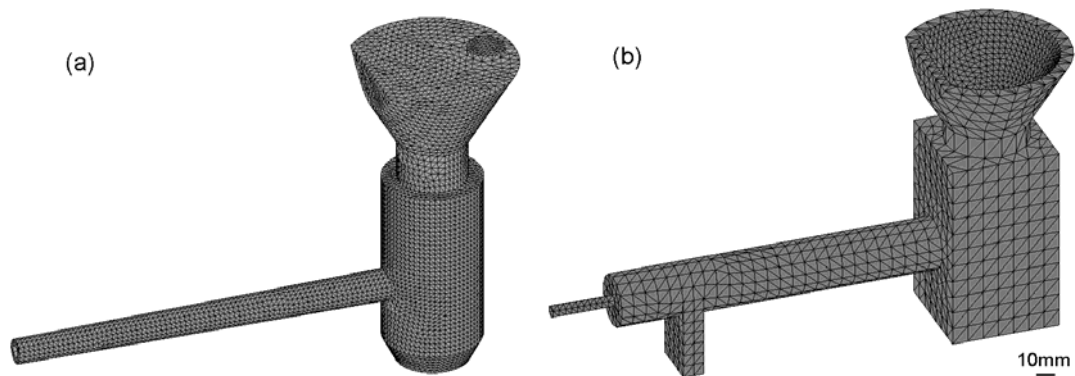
Computational meshing of the casting and mold: (a) casting; (b) mold.
